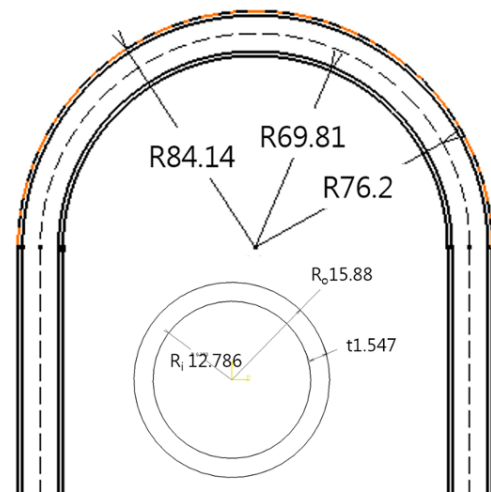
Schematic view of U-shaped heat transfer tube with bending radius of 76.20mm (unit: mm)
